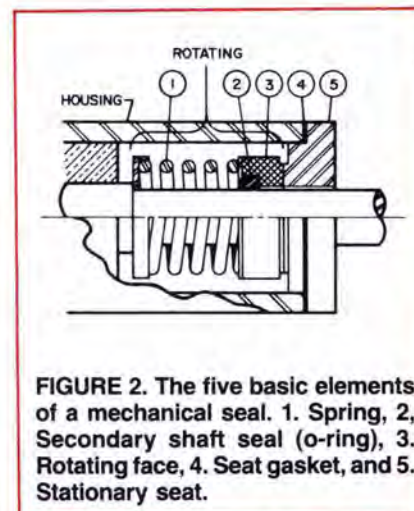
The five basic elements of a mechanical seal. 1. Spring, 2. Secondary shaft seal (o-ring), 3. Rotating face, 4. Seat gasket, and 5. Stationary seat.
